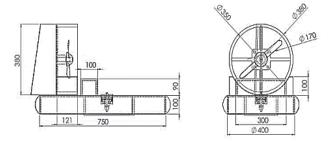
The hovercraft main dimensions. (All dimensions are in mm)
